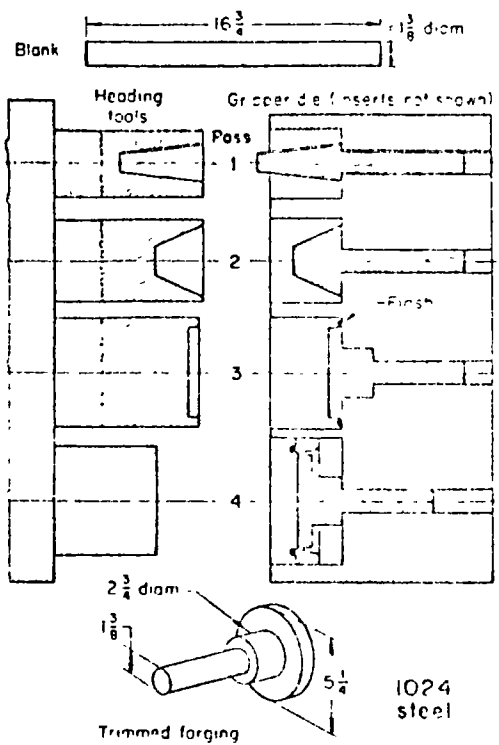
Tooling for upsetting and trimming a flanged forging prior to cold chiseling the stem to 1 1/8-in diam (Example 75)
